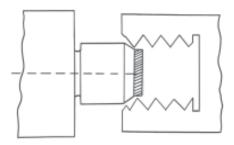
This drawing illustrates how the tenon on the end of the section to be threaded is sized. The inside thread should just fit over the tenon. Thus, you have created a marker for the bottom of the outside thread. When the chaser marks the tenon, the inside thread should screw onto the outside thread.
